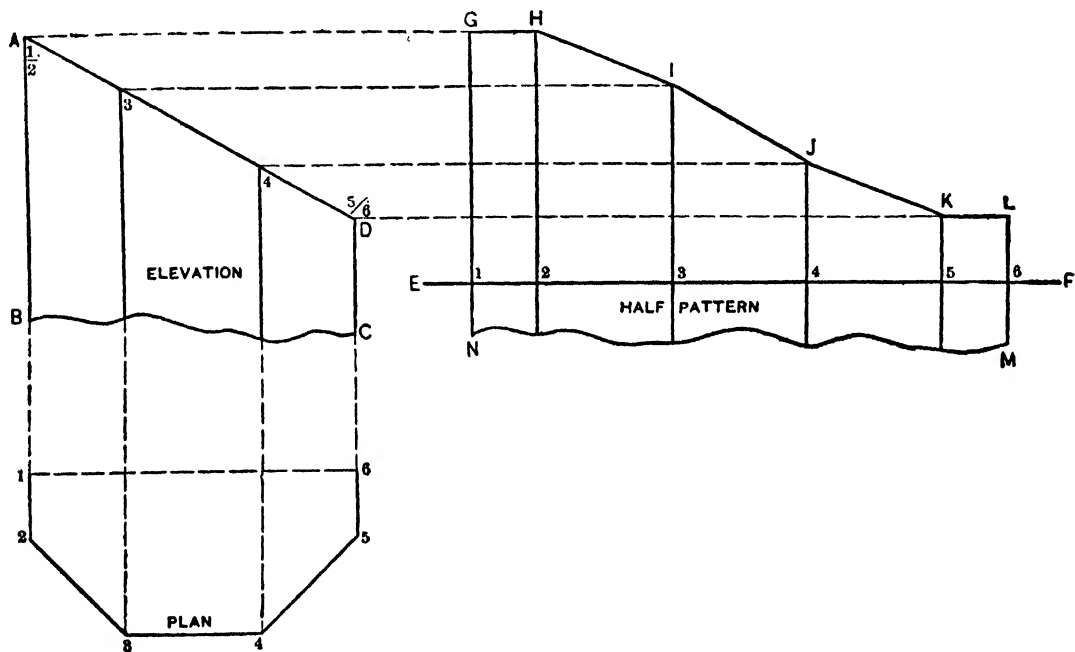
Plan, Elevation and One-Half Pattern for Shaft at Top.
